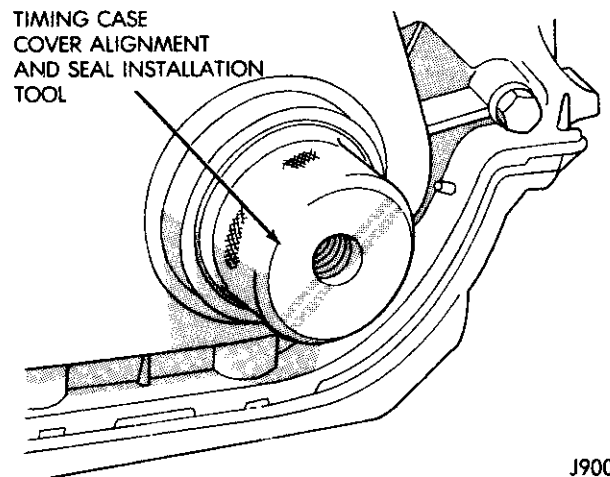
Timing Case Cover Alignment and Seal Installation Tool (6139)
